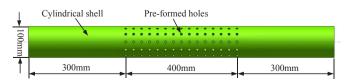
Sketch of a cylindrical shell with pre-formed holes.
